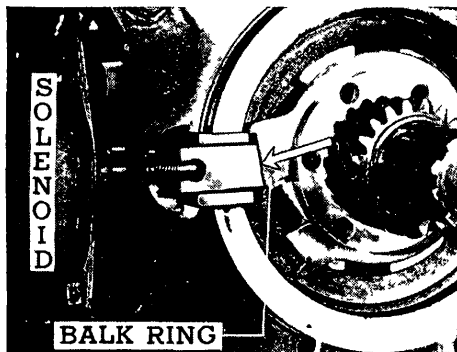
With solenoid energized there should be .015 inch play between solenoid pawl and balk ring
